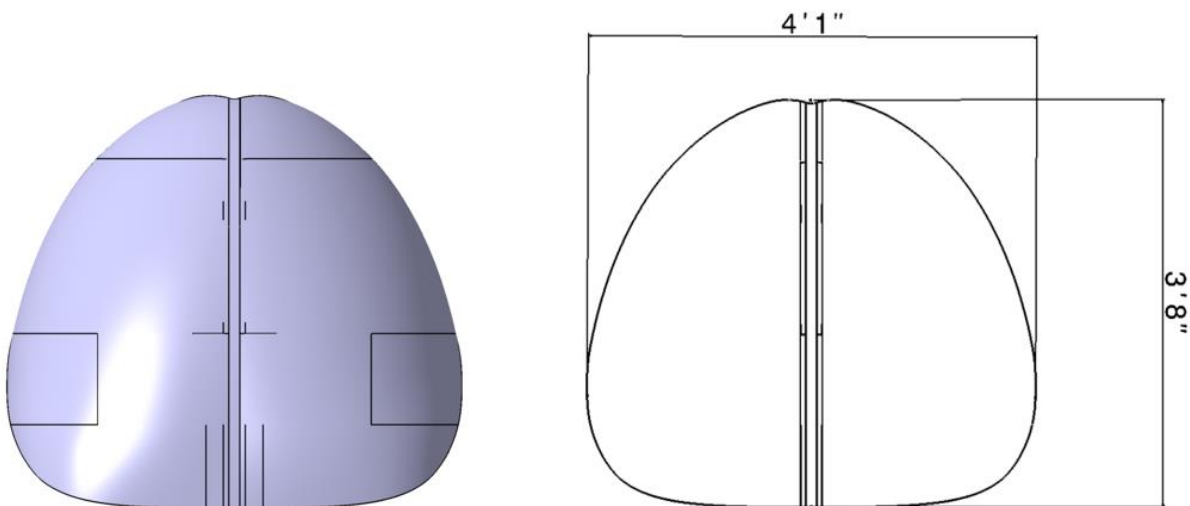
Part 27 Rotorcraft windshield CAD overall dimensions.
